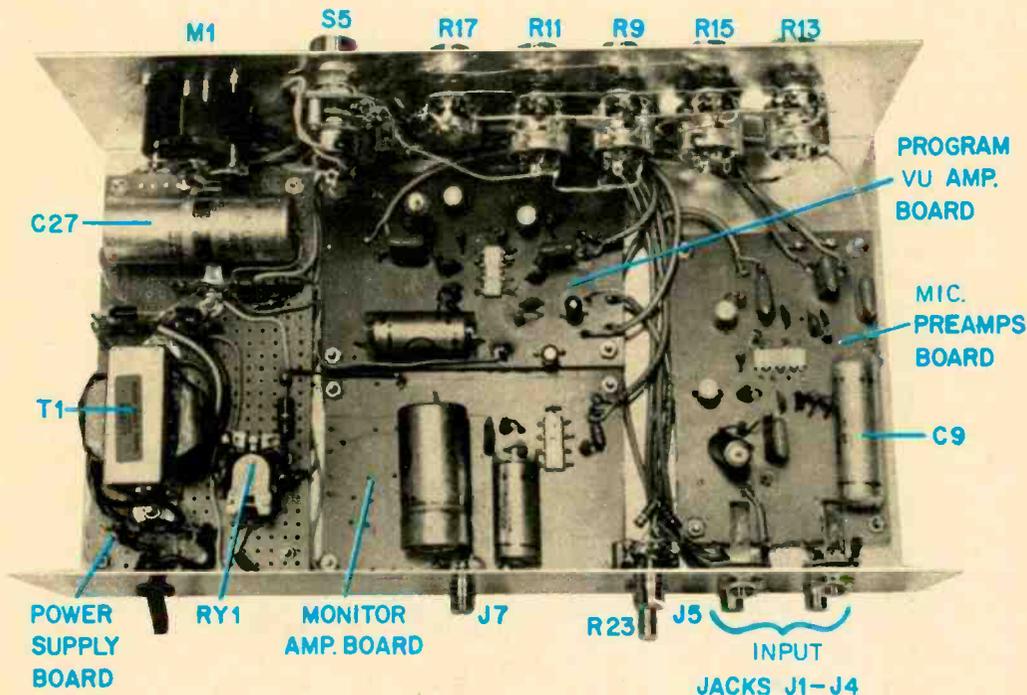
Photo of inside of console shows part locations. Mount cabinet parts before installing boards.
